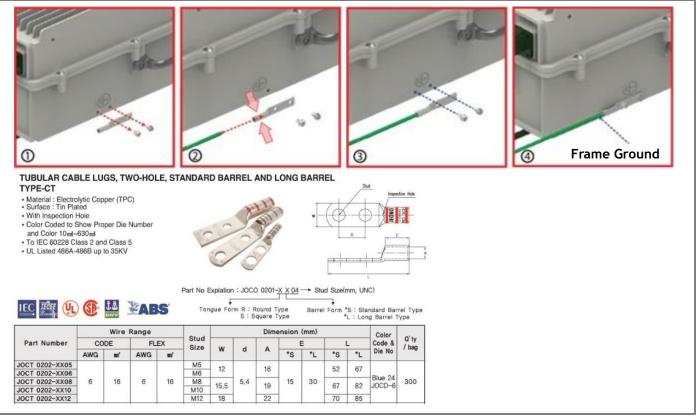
The way to install the Frame Ground Cable and Lug specifications
